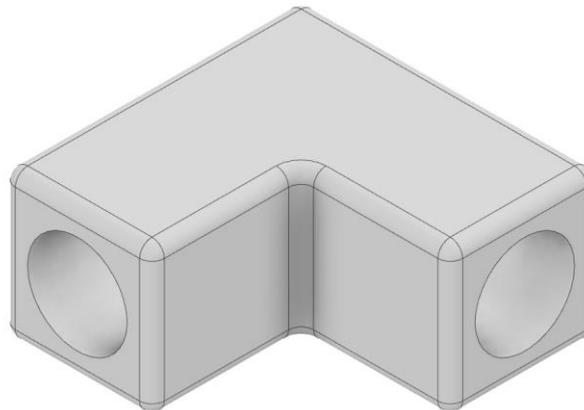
Corner for connection upper horizontal and vertical tubes (Type 1)
